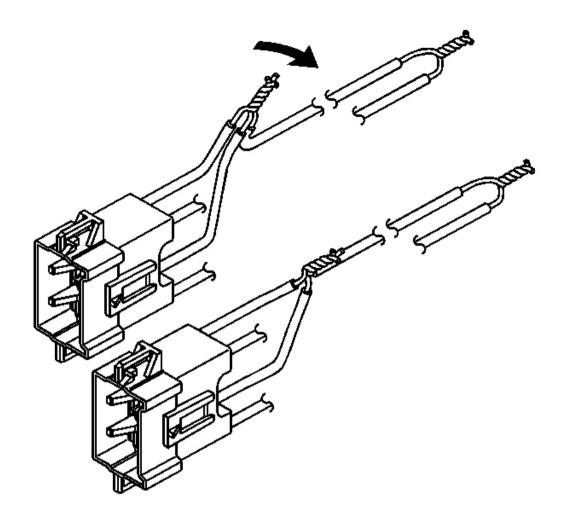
Bending Twisted Connection Flat Courtesy of GENERAL MOTORS CORP.
